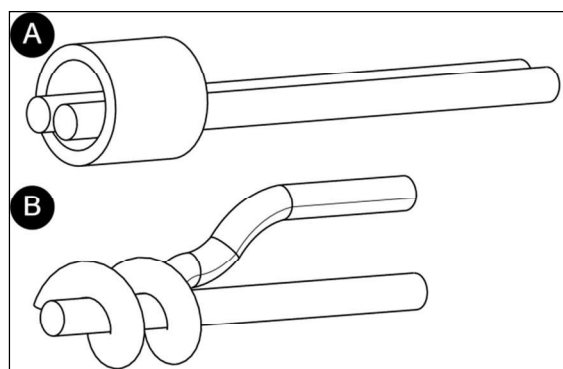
A sketch of sample wires ultrasonic welding (A) and for soldering (B)
